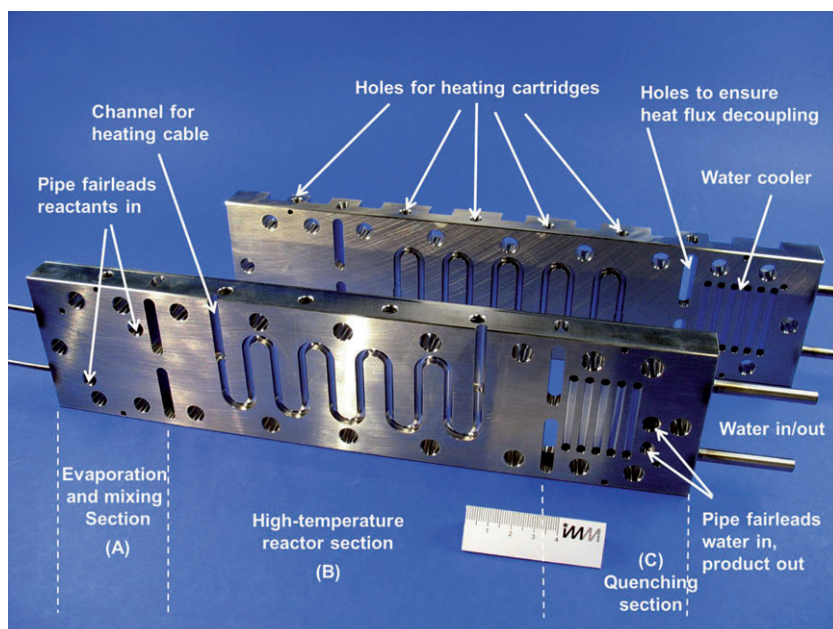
Housing plates with milled grooves for heating cables and cooling channels.
